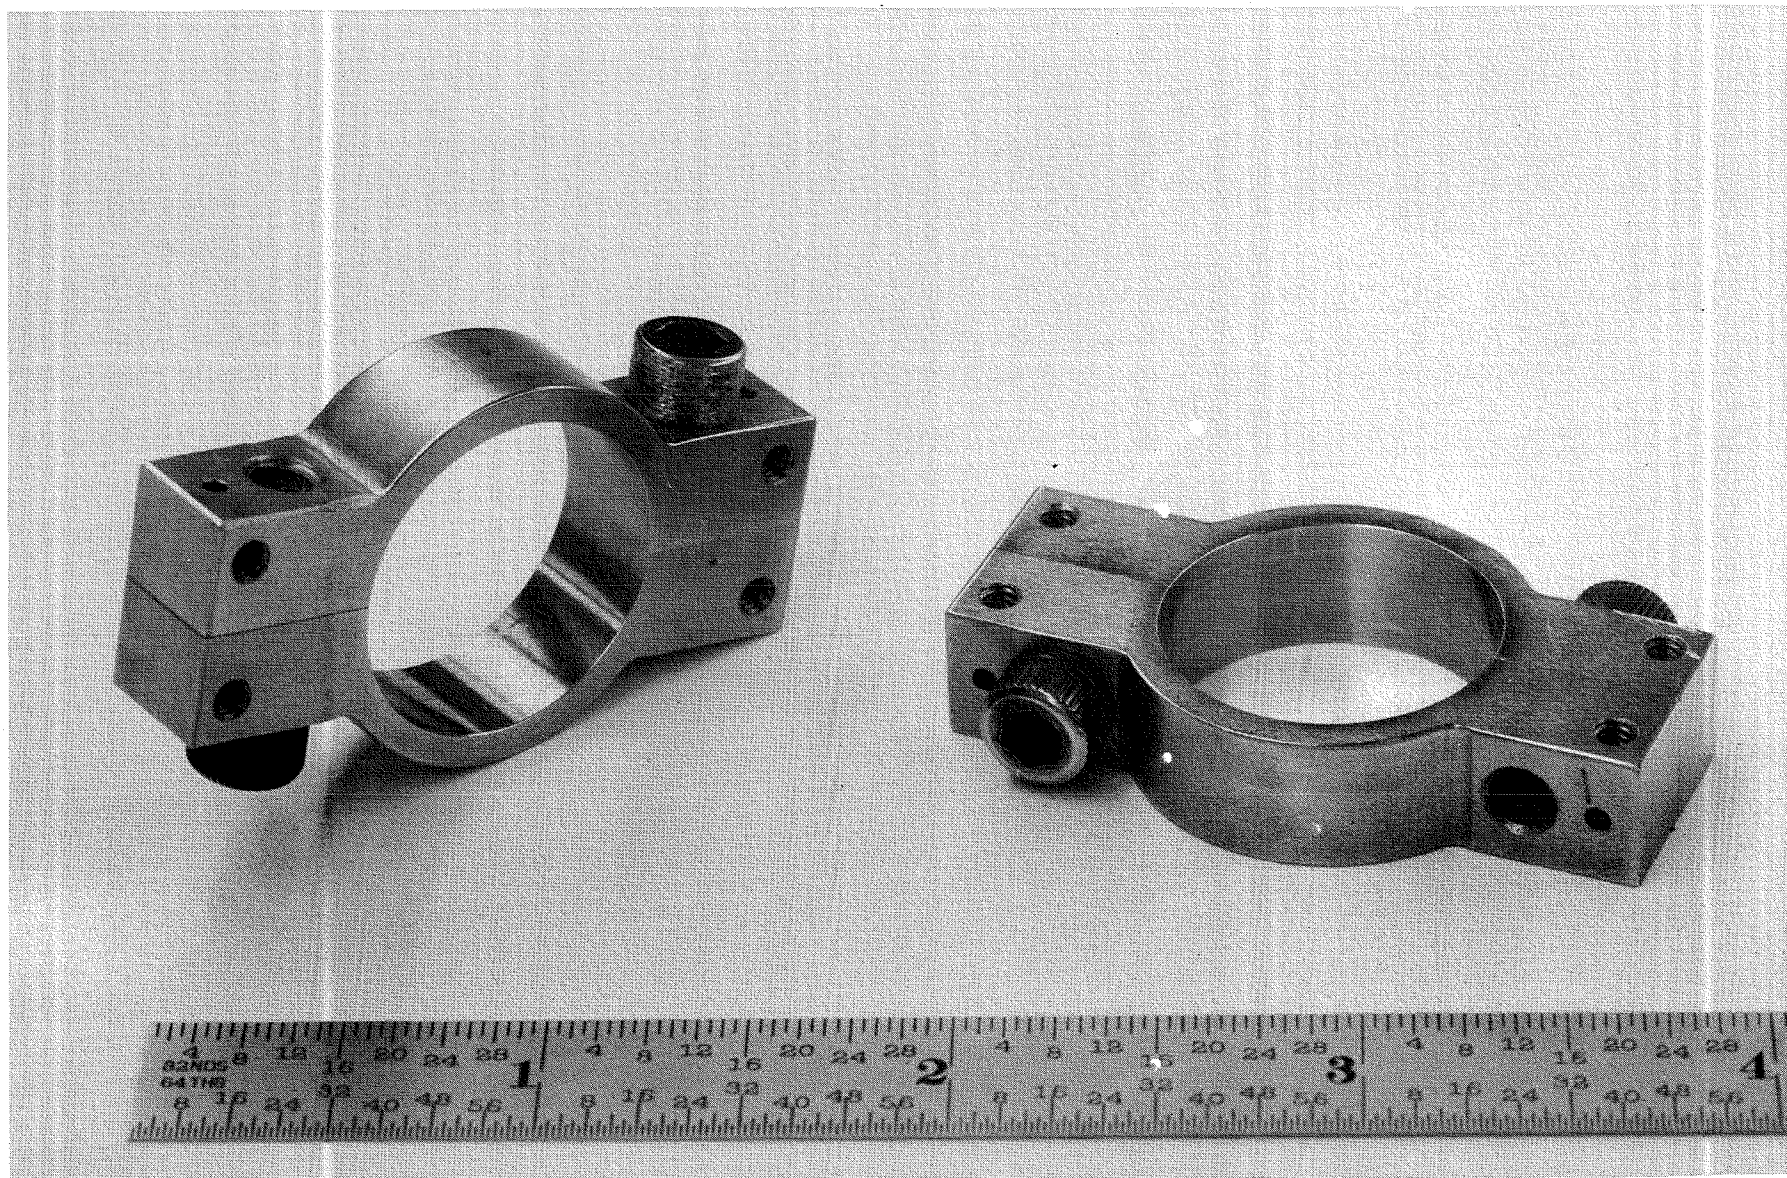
PRECISION BALANCING COLLARS FOR ENGINE ROTOR SIMULATOR
